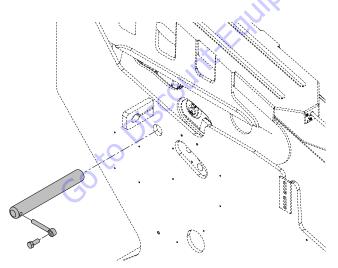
Reassembly of Components - Boom Powertrack Assembly
